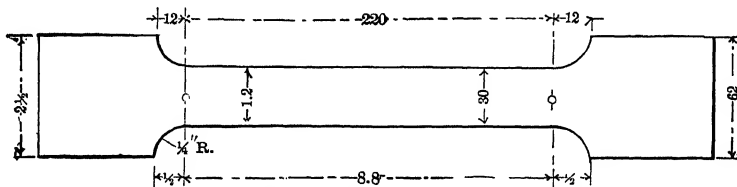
TEST-PIECE FOR FLAT SPECIMENS.
